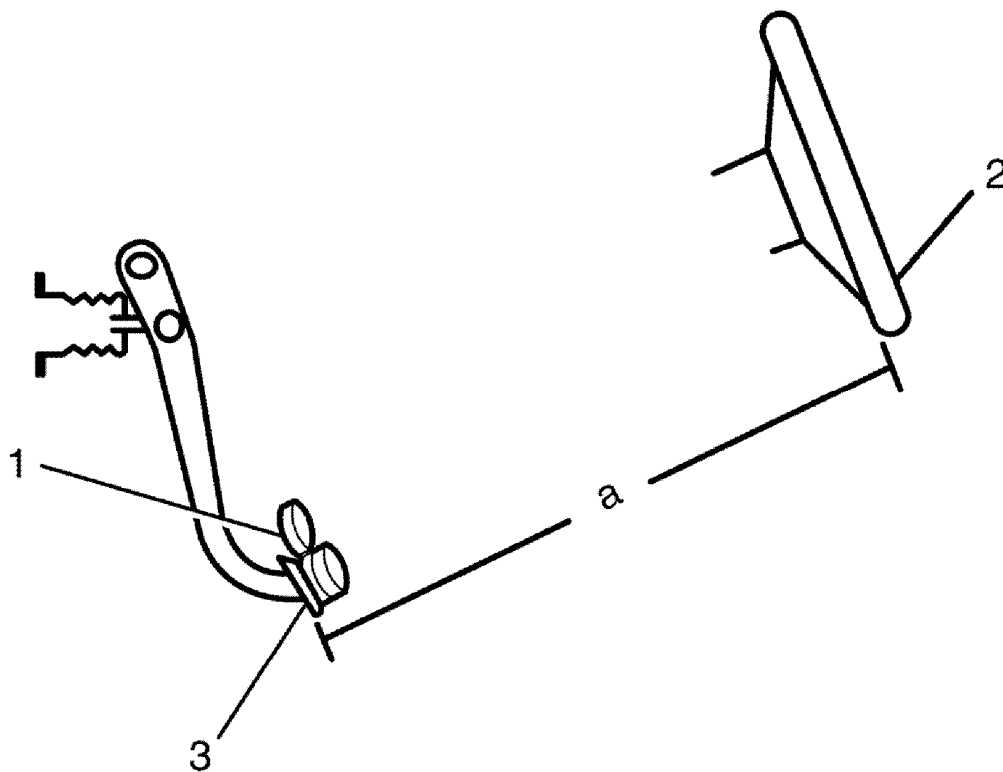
Steering Wheel, Brake Pedal And Gauge
